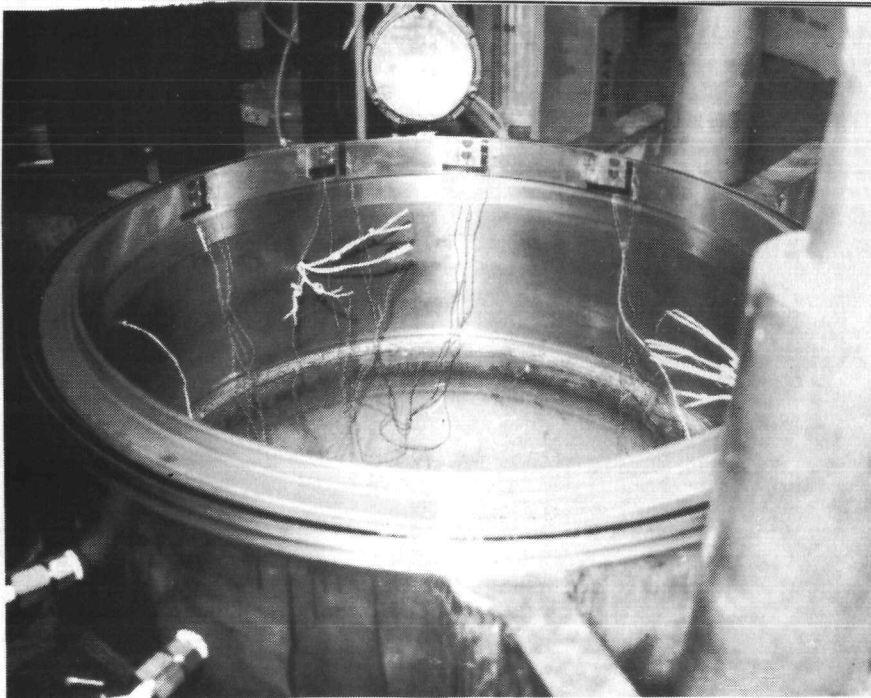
Strain Gaged Ring in Fixture (C79-668)
